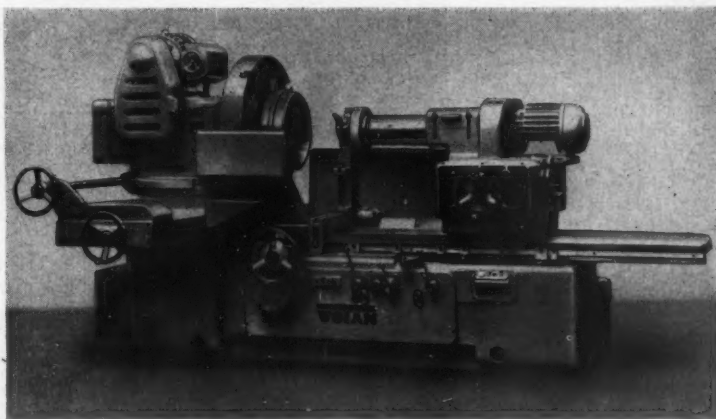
Wotan type S 313/12U hydraulic grinding machine set-up for operations on an inner ring for a double-row taper roller bearing
